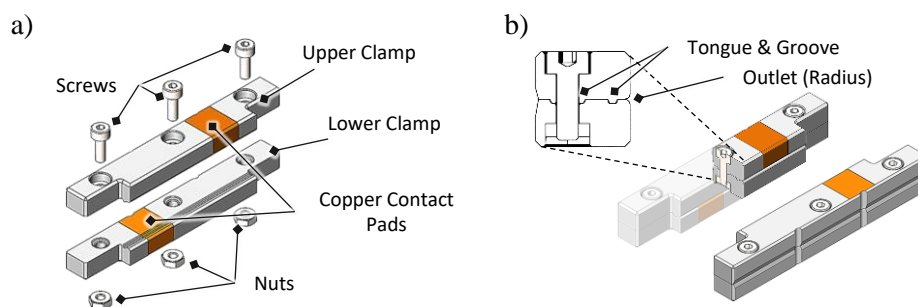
CAD design of SIP clamps in exploded view (a) and assembly with details of tongue and groove assembly in cross-sectional view (b).
